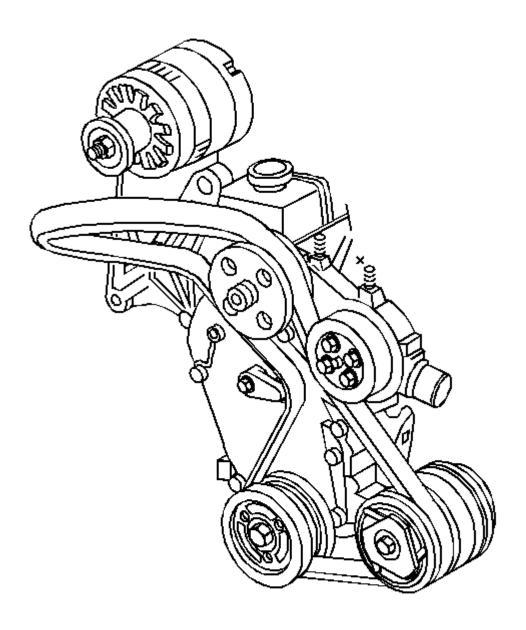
Drive Belt Routing Courtesy of GENERAL MOTORS CORP.
